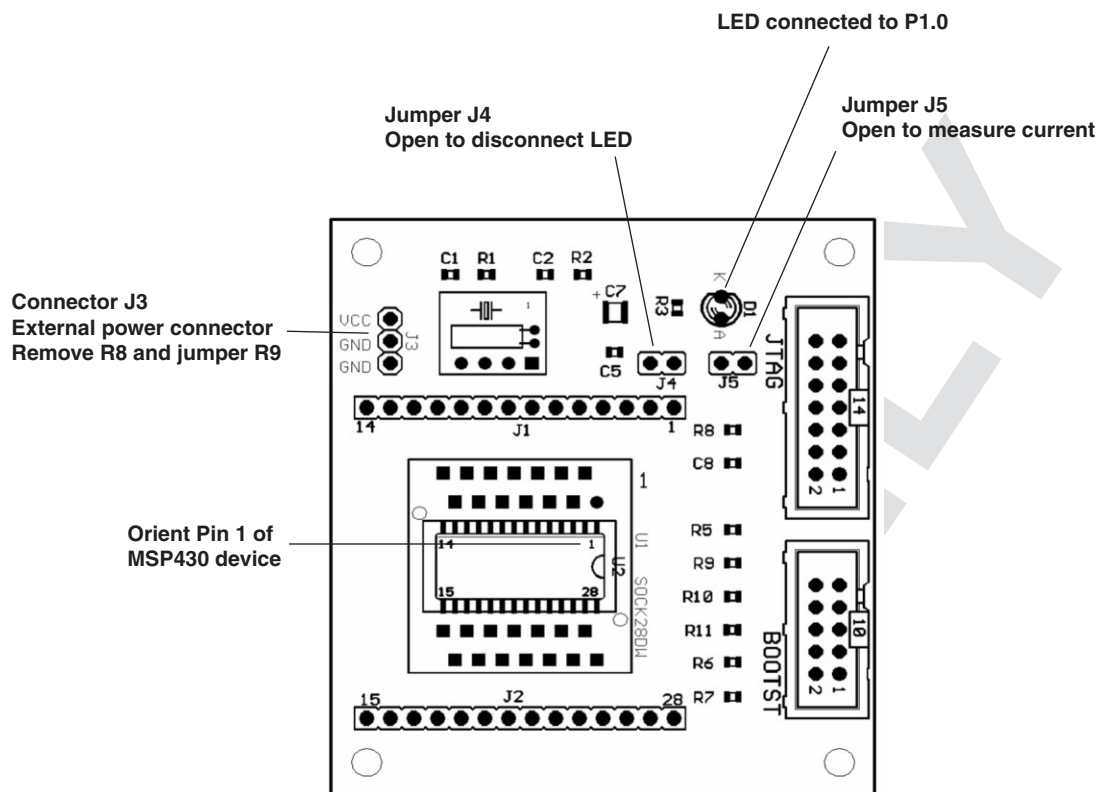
MSP-TS430DW28 Target Socket Module, PCB
